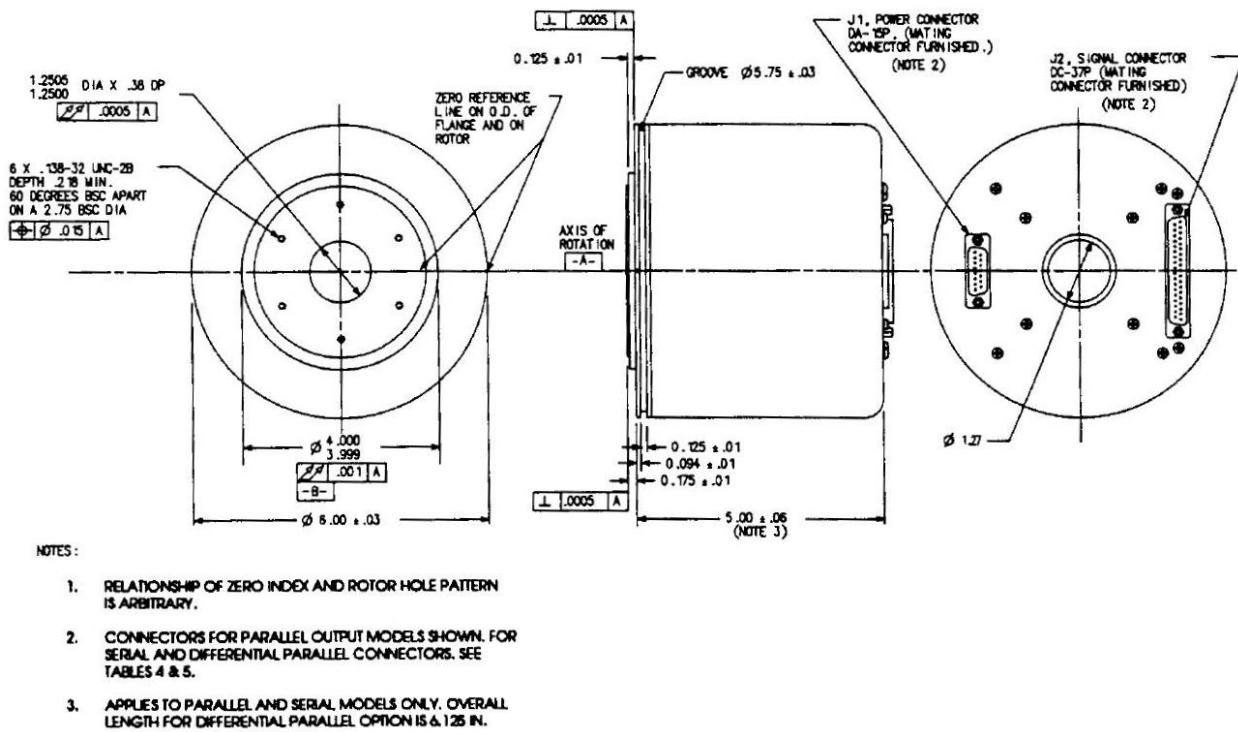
, OUTLINE, HOLLOW SHAFT ENCODER
